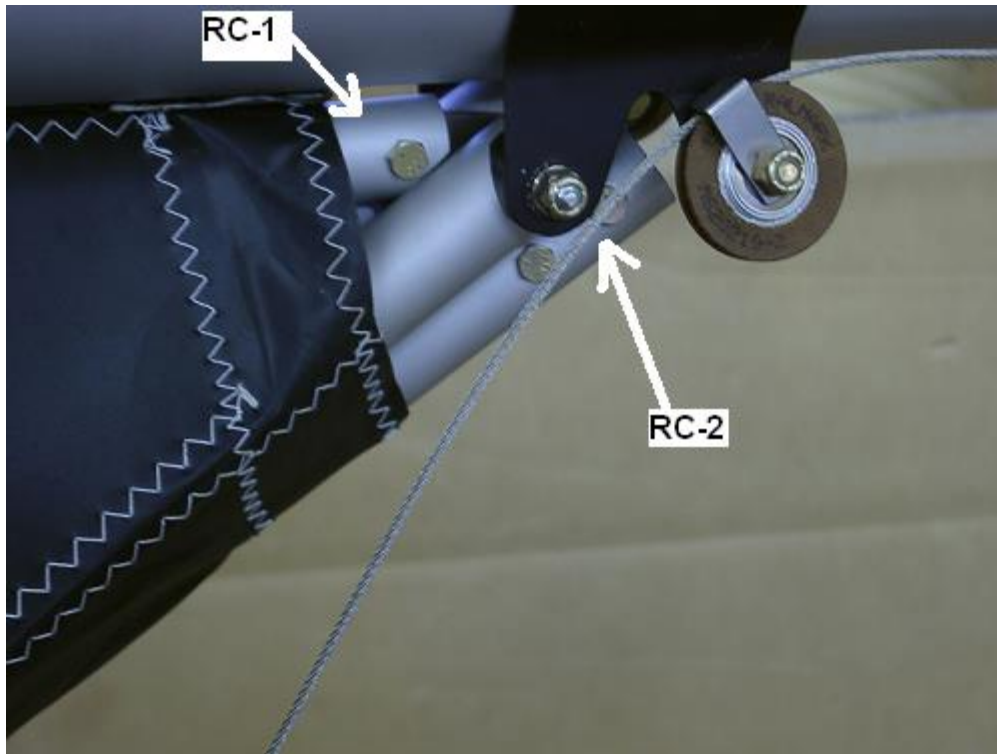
Tail Strut Mounting Bracket (RC-1, RC-2 and Tail Struts)
